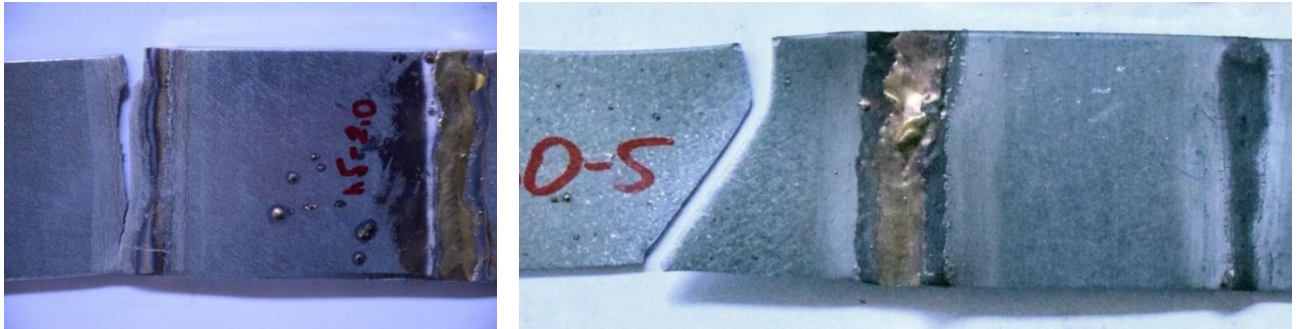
Failure modes of CMT-1.5-2.0 specimens
